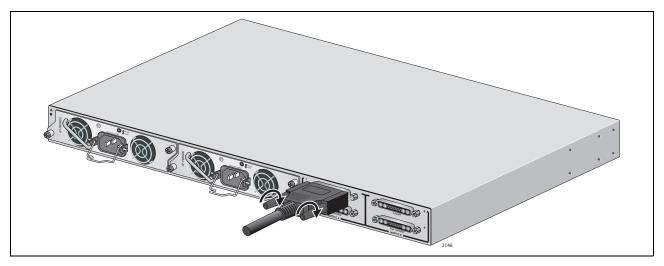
Securing the AT-RPS-CBL1.0 Cable to the AT-RPS3000 Chassis
